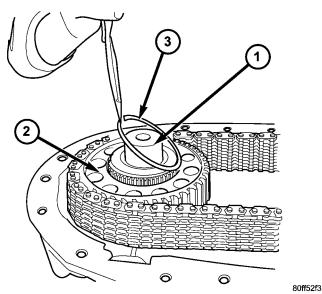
Remove Front Output Shaft Sprocket Retaining Ring
